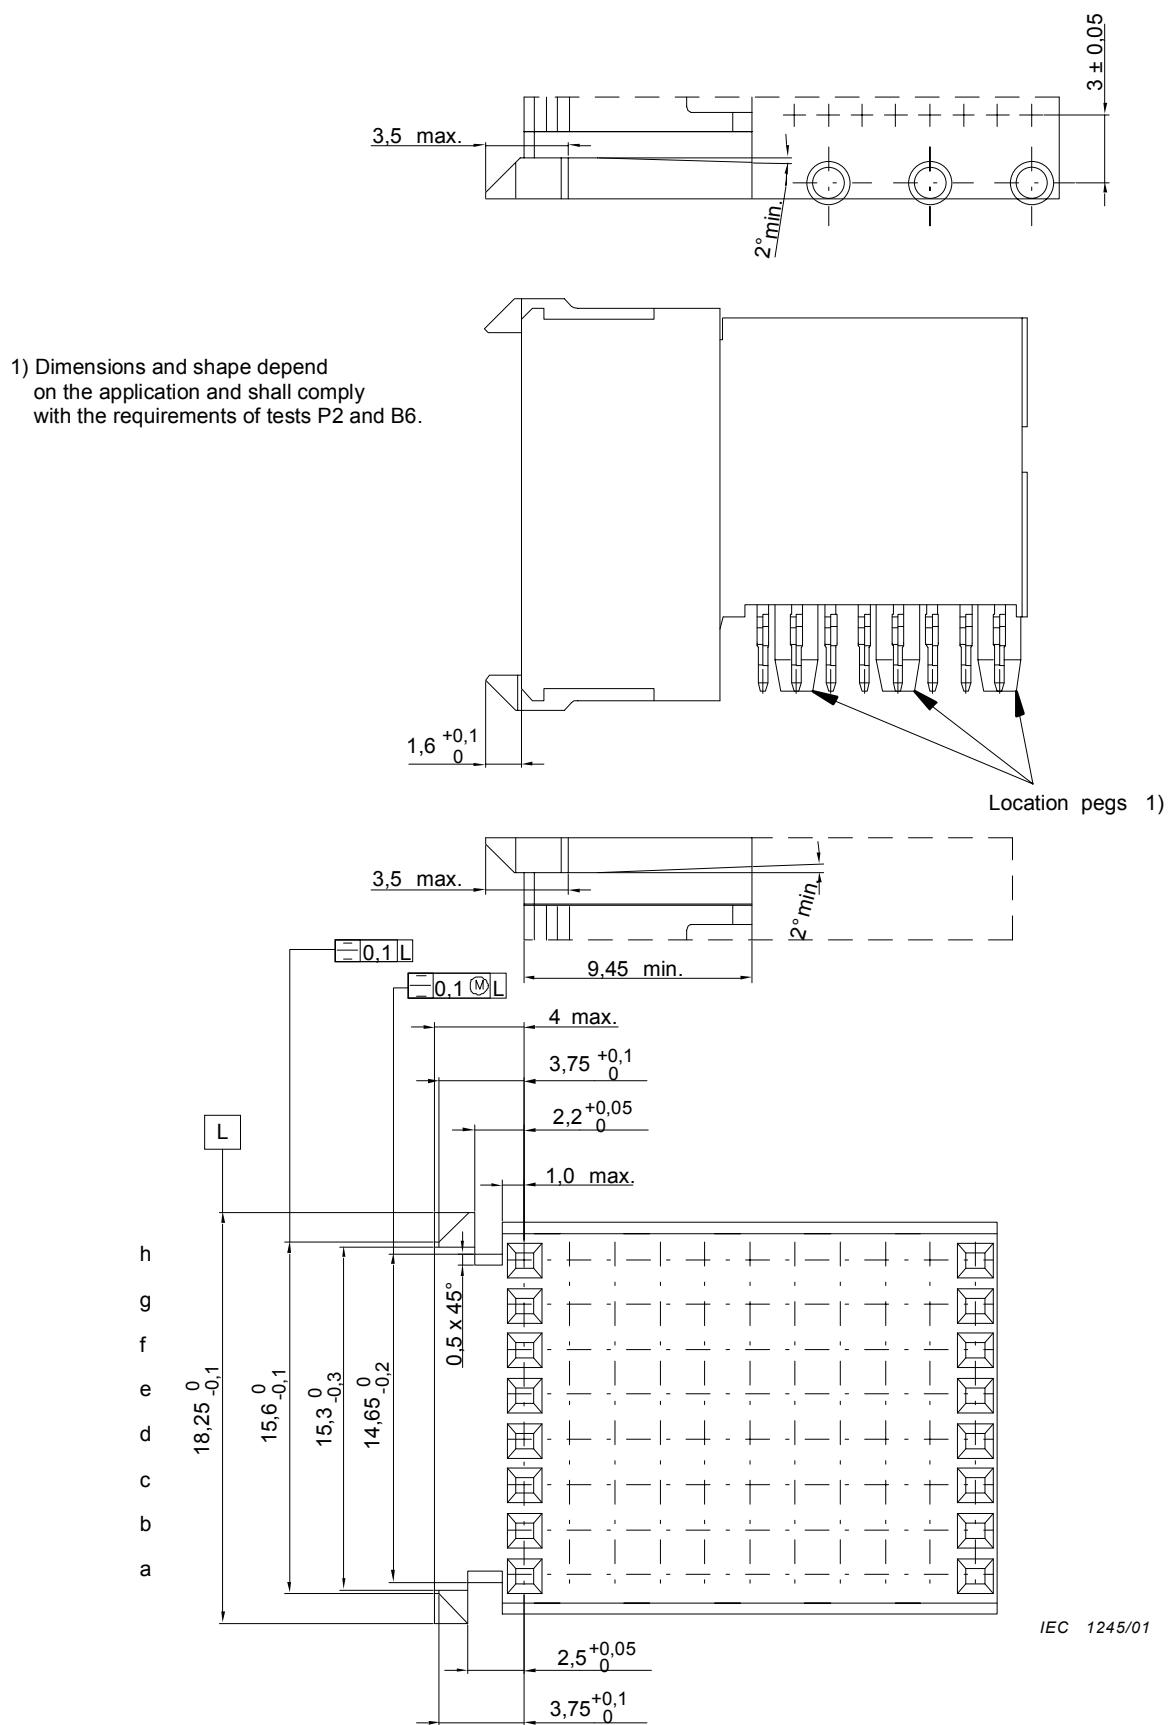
Dimensions of style F, free 25 mm extension module (eight rows)
